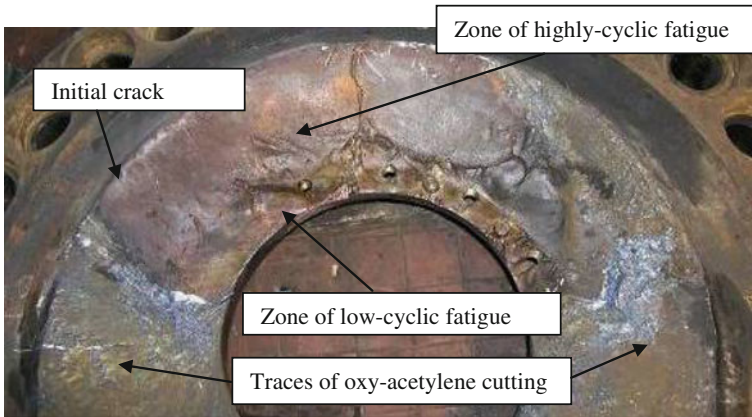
Large flange of the turbine shaft A6 at HE Djerdap II after cutting
